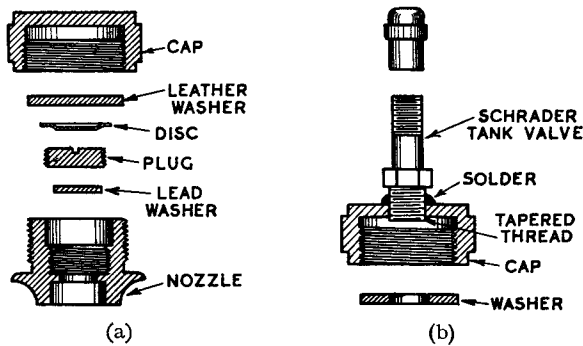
(a) AIR NOZZLE AND (b) AIR NOZZLE CAP FITTED WITH VALVE.
